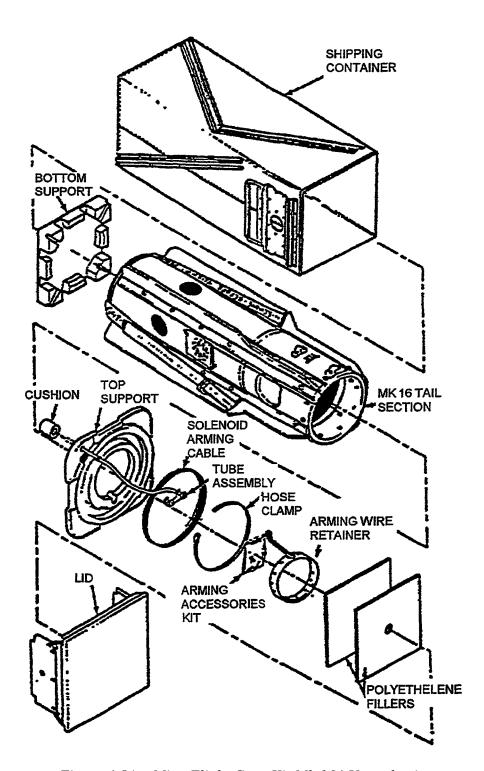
A. Mine Flight Gear Kit Mk 164 Unpackaging
